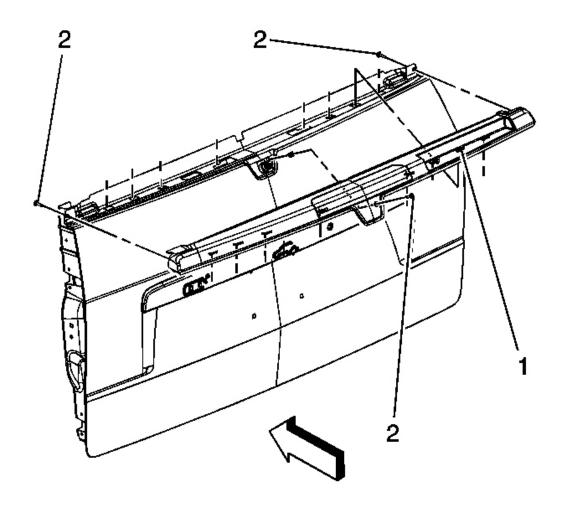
Identifying Reveal Molding Courtesy of GENERAL MOTORS CORP.
